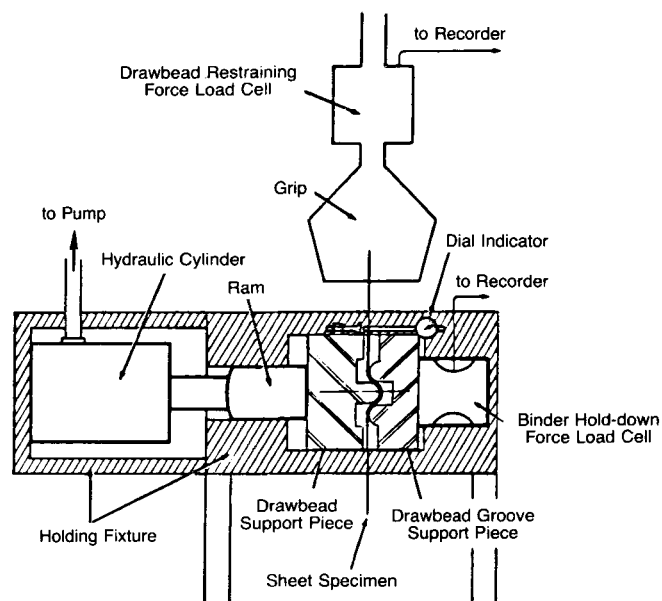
Schematic diagram of drawbead simulator apparatus for measuring drawing and clamping forces.
